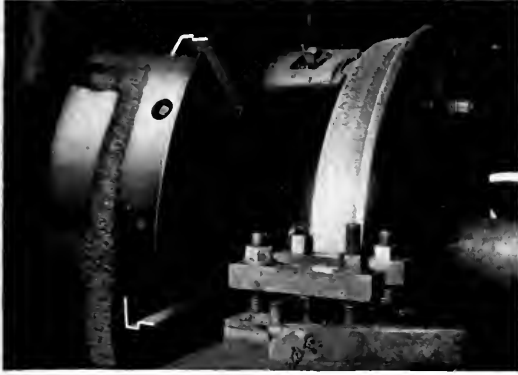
Cast Iron Head of Car Wheel Lathe Repaired by Electric Arc
